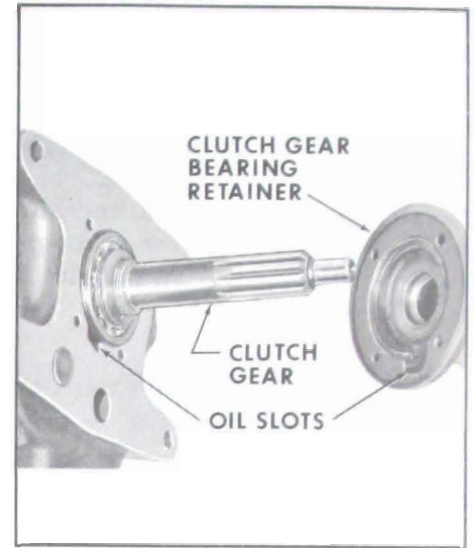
Clutch Gear Bearing Retainer Oil Slot
